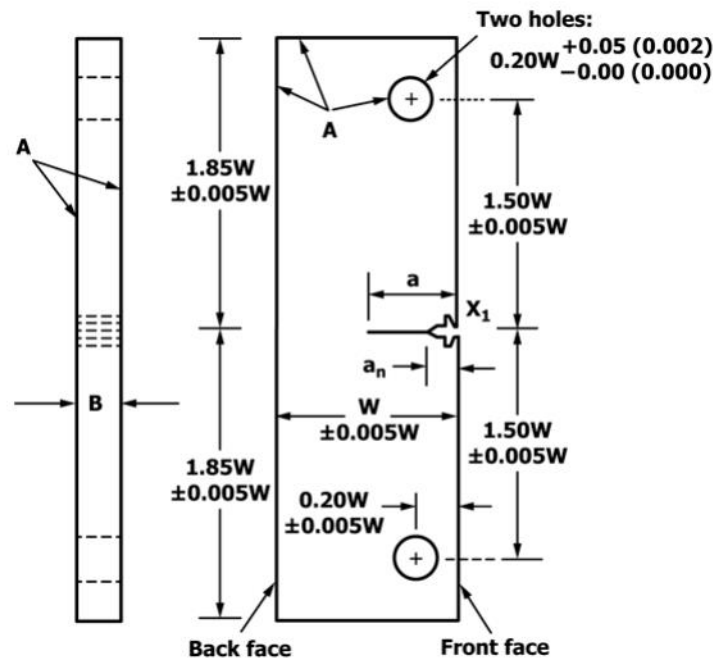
Standard eccentrically loaded single edge crack tension specimen.
